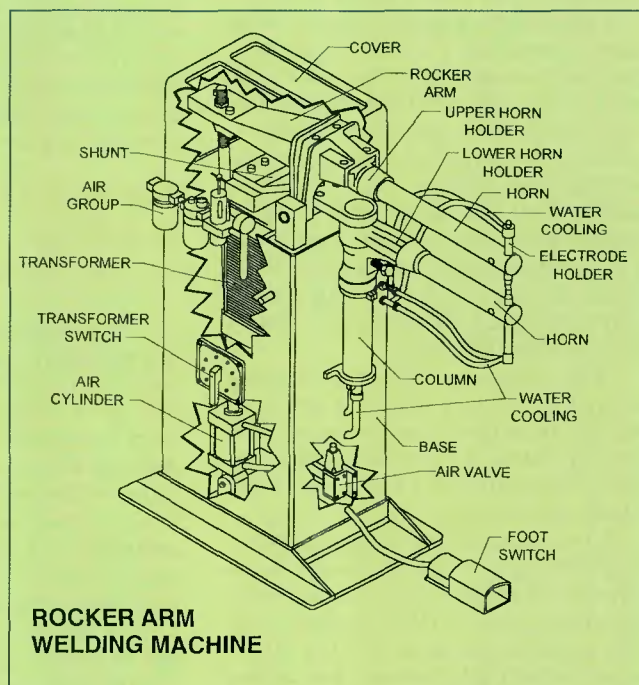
A diagram of a typical rocker arm spot welding machine.
